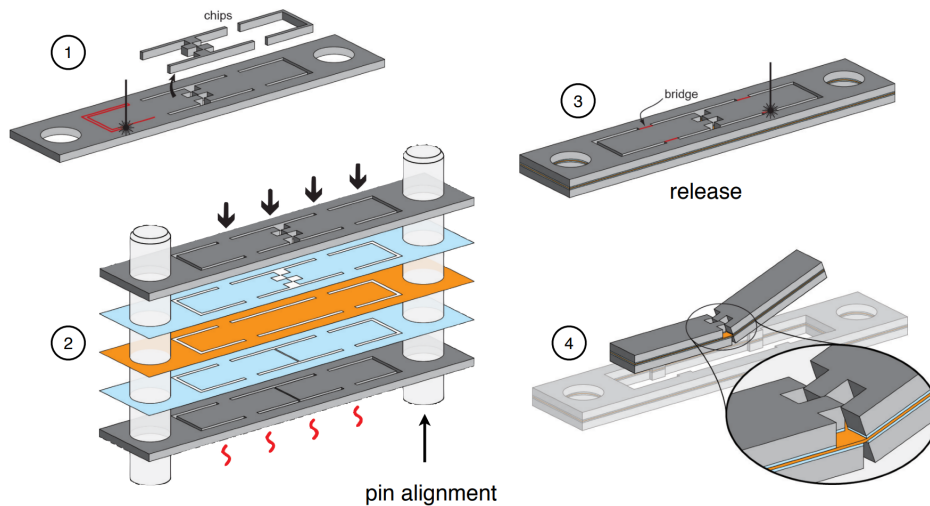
An example of folding robotics principles employed for the purpose of fabricating a foldable joint. Step one consists of cutting out an appropriately designed piece of carbon fiber with a DPSS laser, with castellated hinges placed to allow for folds without interference. In step 2 the light blue sheets of pyralux adhesive are layered with the orange sheet of kapton and our previously cut carbon fiber before being placed in a heat press to cure. Step 3 consists of utilizing the previously used DPSS laser to sever the cured layup from the excess carbon fiber used for alignment. The final step 4 illustrates the castellated joint allowing the pieces to bend and meet at a right angle without collision. Provided by [1].
